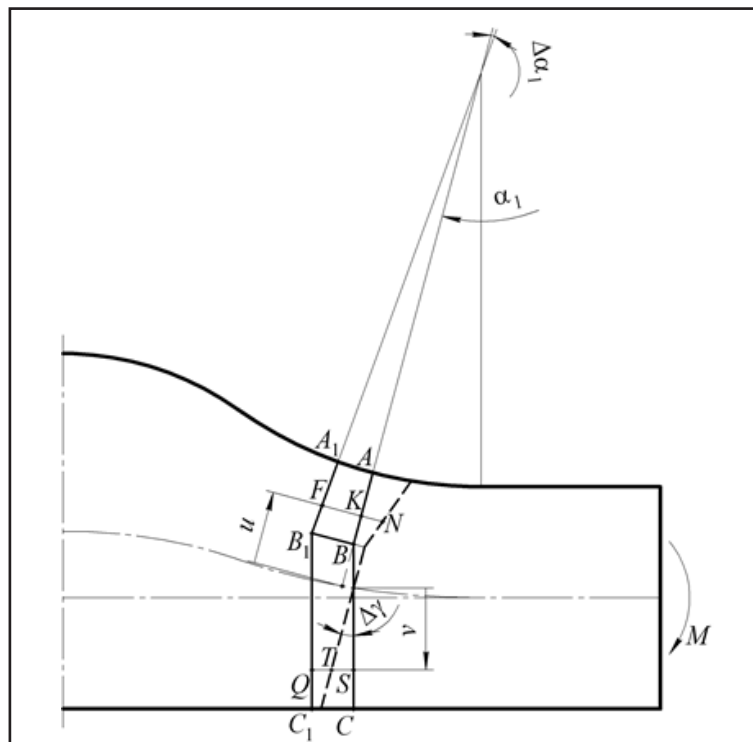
Rotation of the broken cross-section during the bending of the butt welded joint
